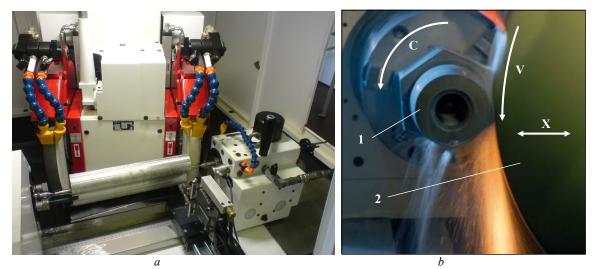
Working area grinding CNC machine company Studer (a) and grinding the hex stamp (b)
